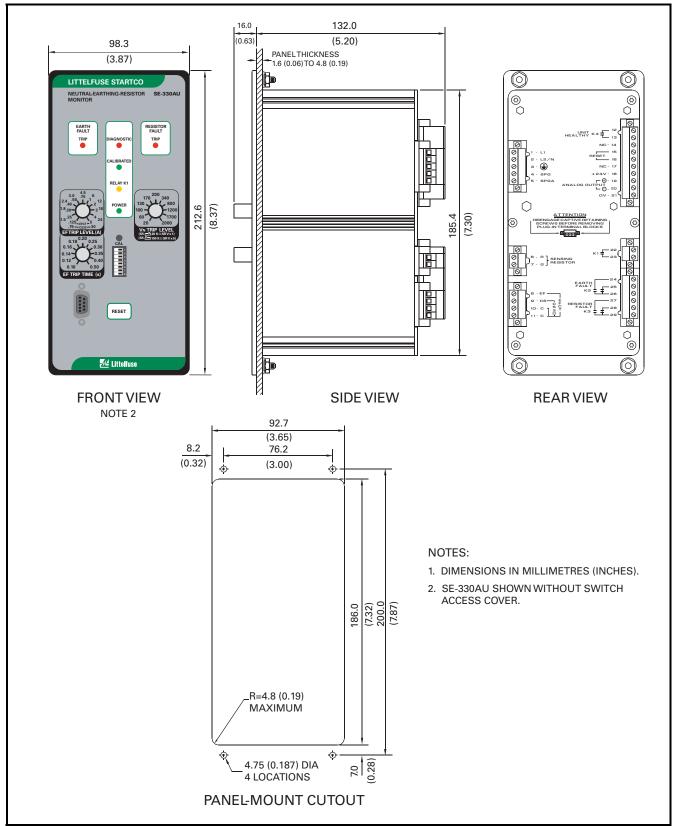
SE-330AU Outline and Panel-Mounting Details.
